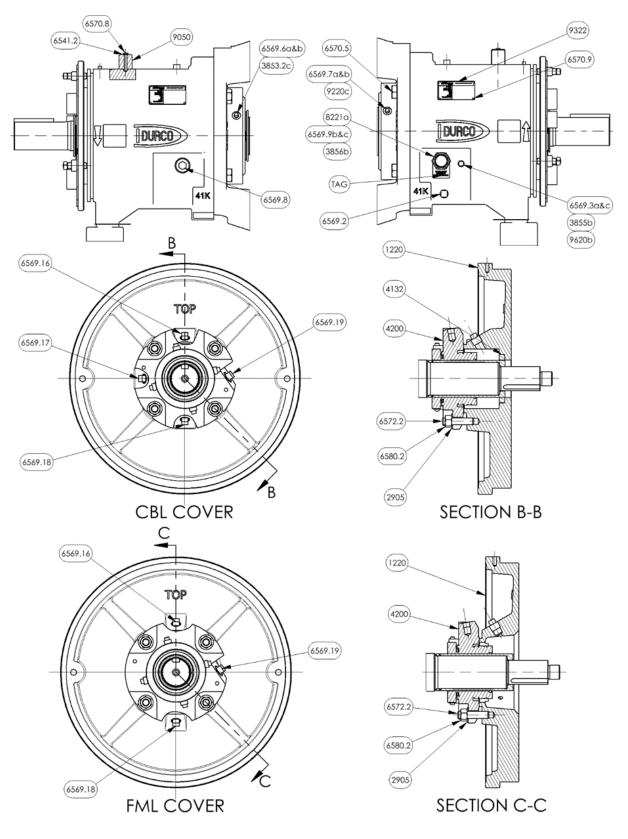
Sectional of APE4 bearing housing, CBL & FML Covers
